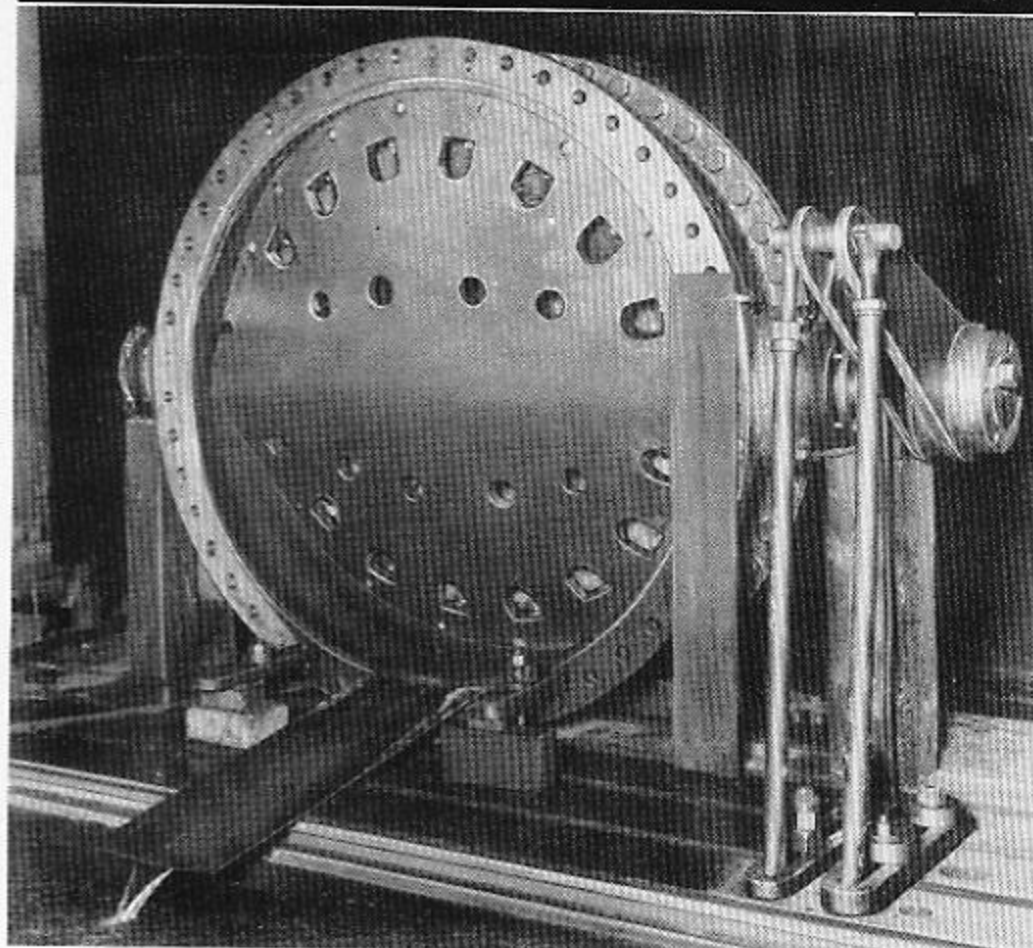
Medium size, 66 in. butterfly type valve, assembled, under hydrostatic test of about 150 lb/sq ft pressure.
